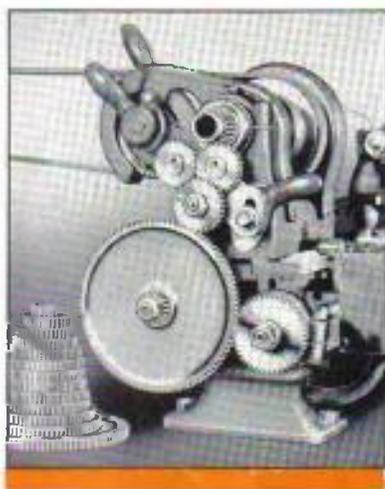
New Twin Gear Reverse Mechanism furnished on 1936 Model 9-inch "Workshop" Lathe. Reverse Lever is in "Up" position for Right Hand Threads and Feeds.
